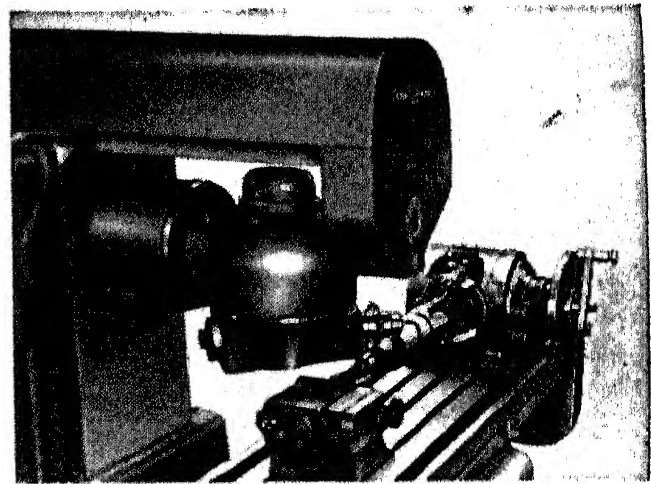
A universal spiral milling attachment set up for milling a large helix angle. (Courtesy The Cincinnati Milling Machine Co.)
